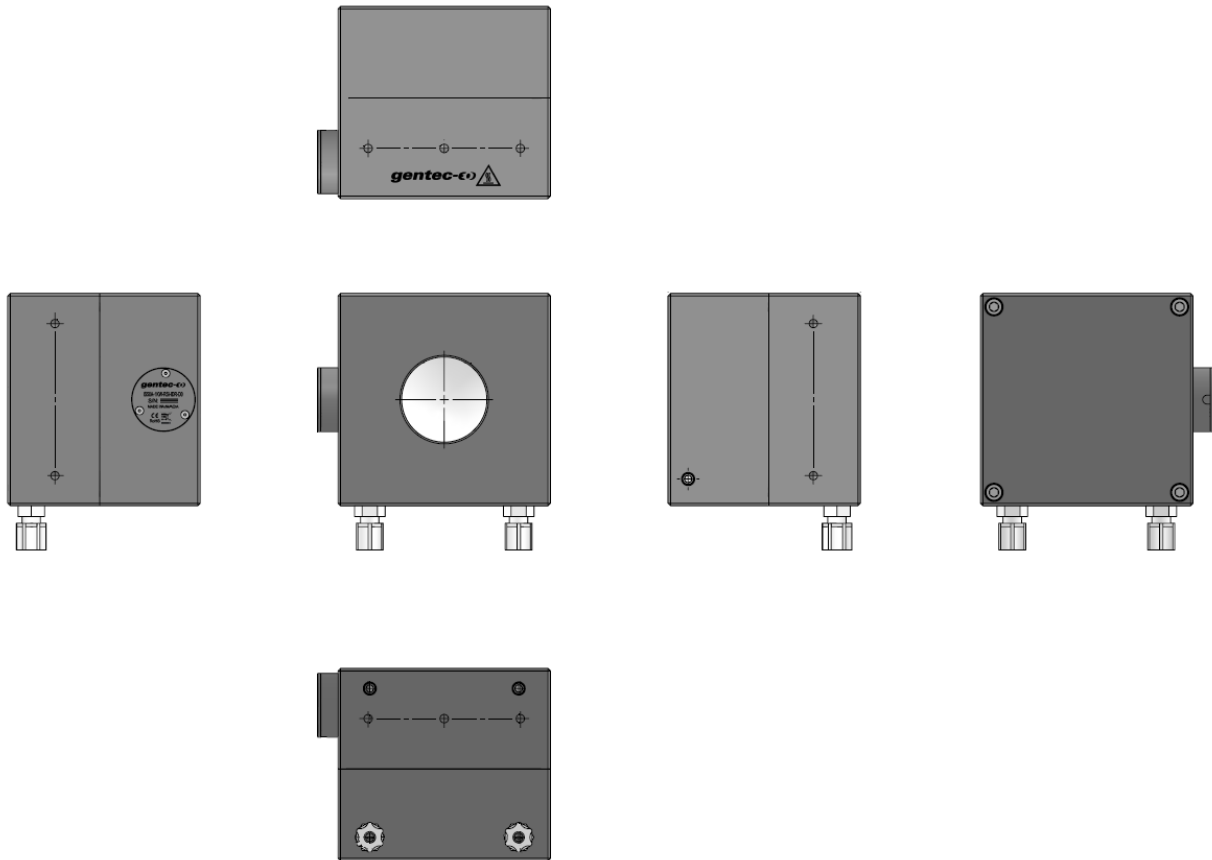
Layout drawing, IS50A-1KW-RSi-INT/IDR-D0.
